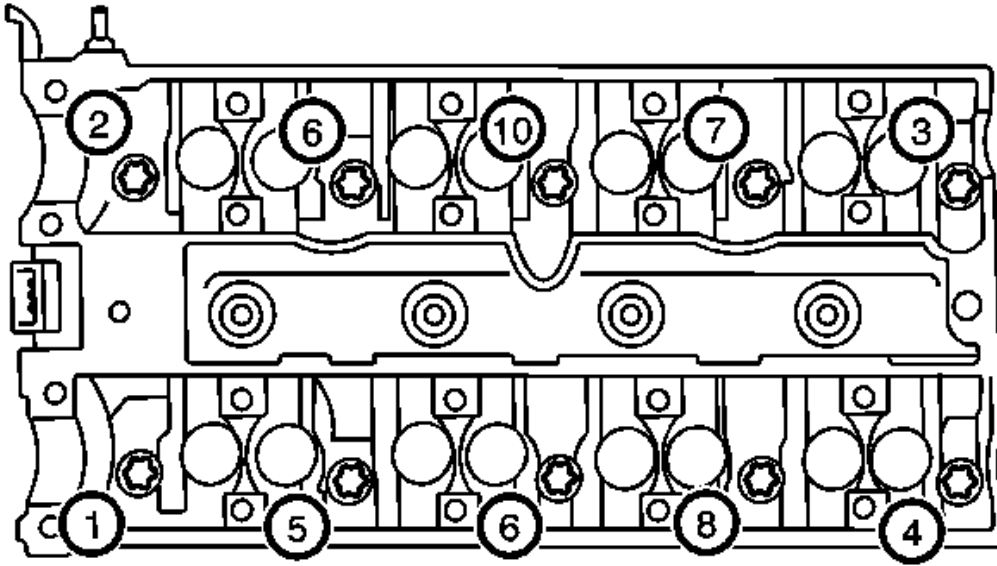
Identifying Cylinder Head Bolt Loosening Sequence
